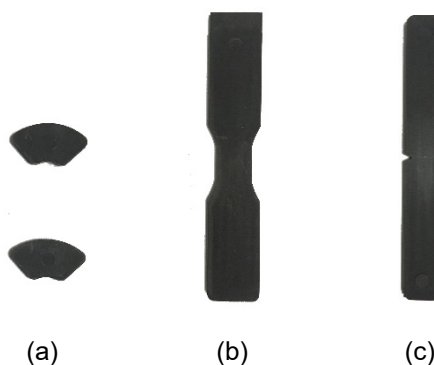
Workpiece (a), Tensile's specimen (b) and Impact's specimen (c) prepared by injection molding
